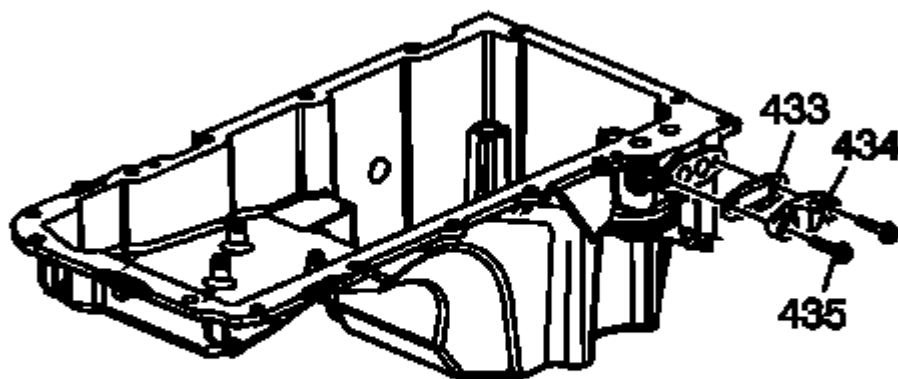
View Of Oil Pan Cover, Bolts & Gasket
